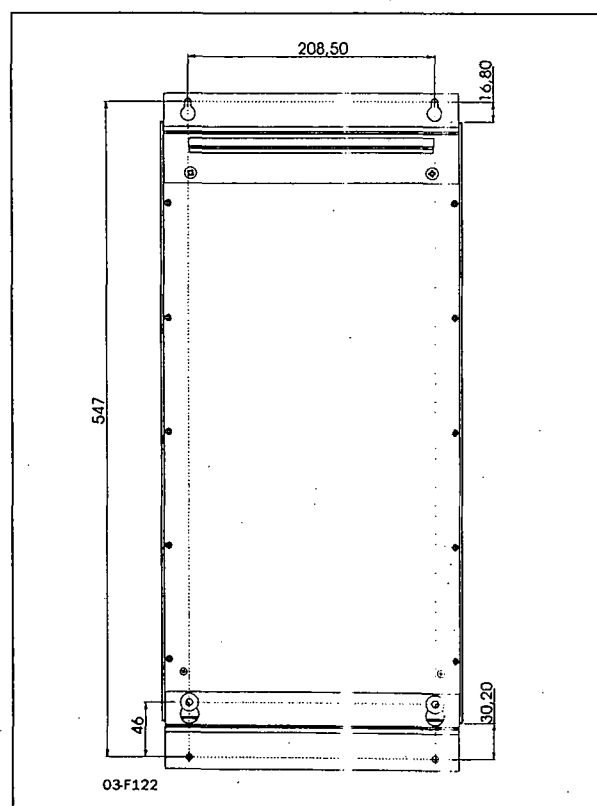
Hole pattern for MSF-170 to MSF-250 with upper mounting bracket instead of DIN-rail.
